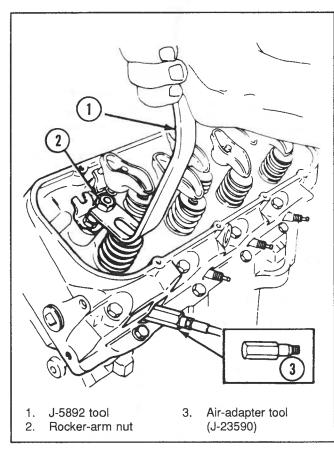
Compressing Valve Spring With Cylinder Head Installed
